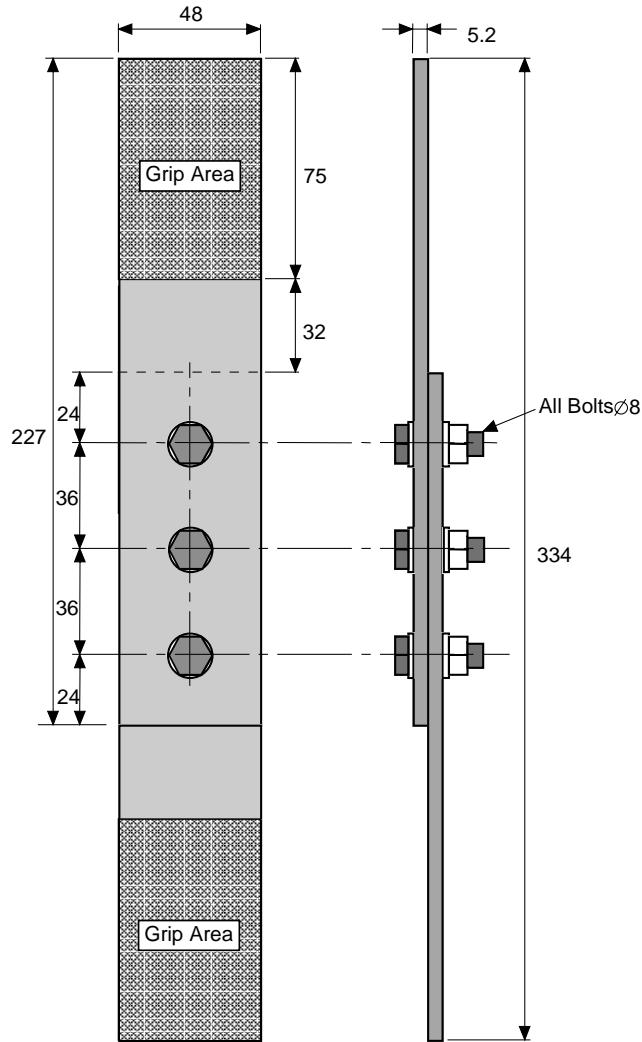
Single-lap three-bolt geometry (all dimensions in mm)
